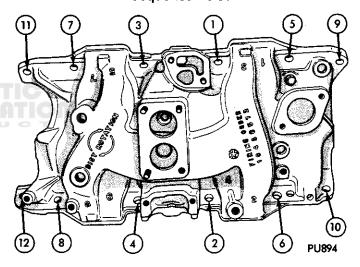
Intake Manifold Bolt Tightening Sequence - 5.2L/5.9L
